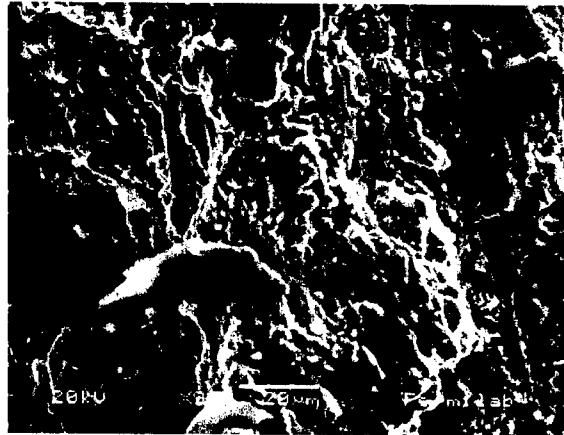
Lens 20 conductor tube brittle fracture surface.
